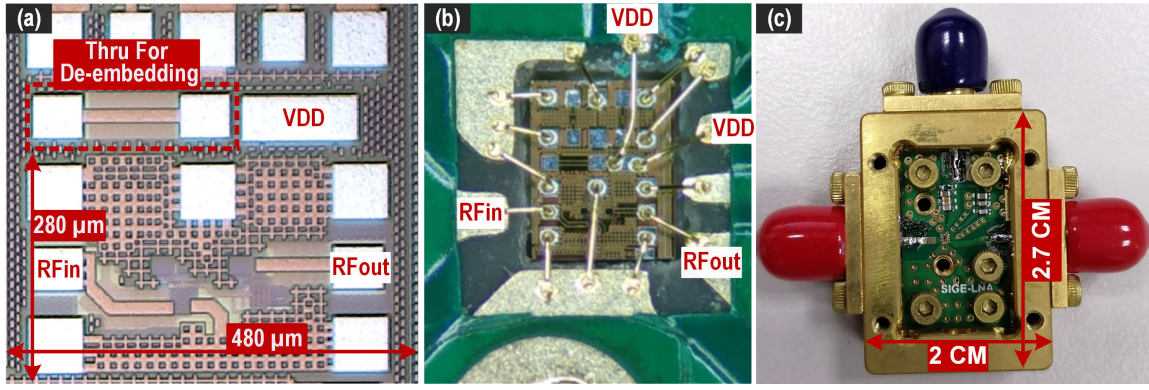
(a) Fabricated LNA die micrograph. (b) Macro photograph of the wire bonding scheme. (c) Photograph of the LNA module.
